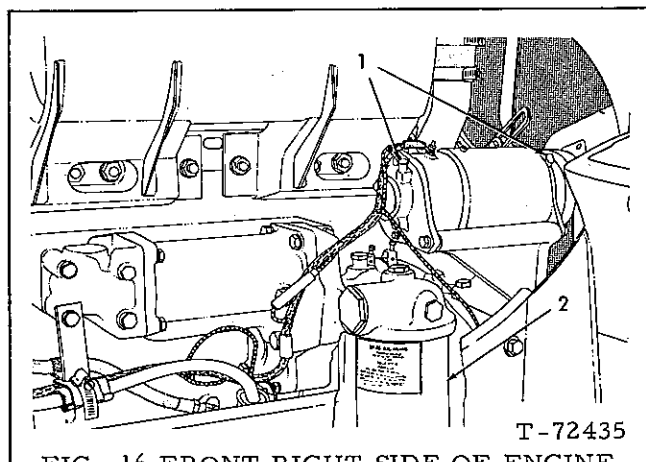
FRONT RIGHT SIDE OF ENGINE
